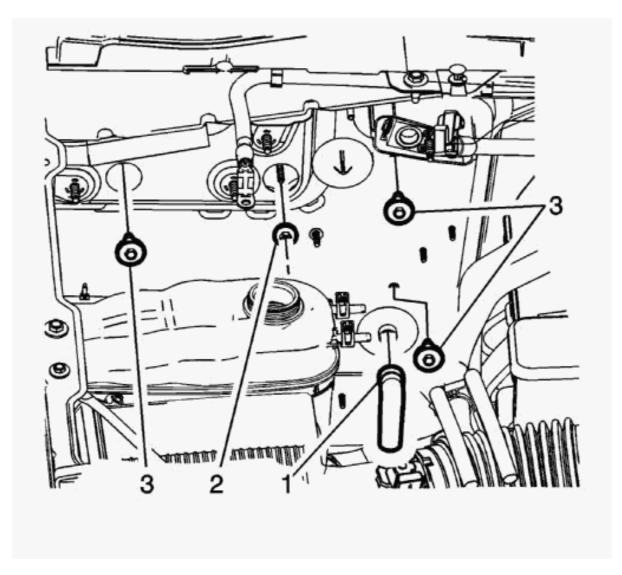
Air Conditioning Evaporator Case Drain Tube Courtesy of GENERAL MOTORS COMPANY
